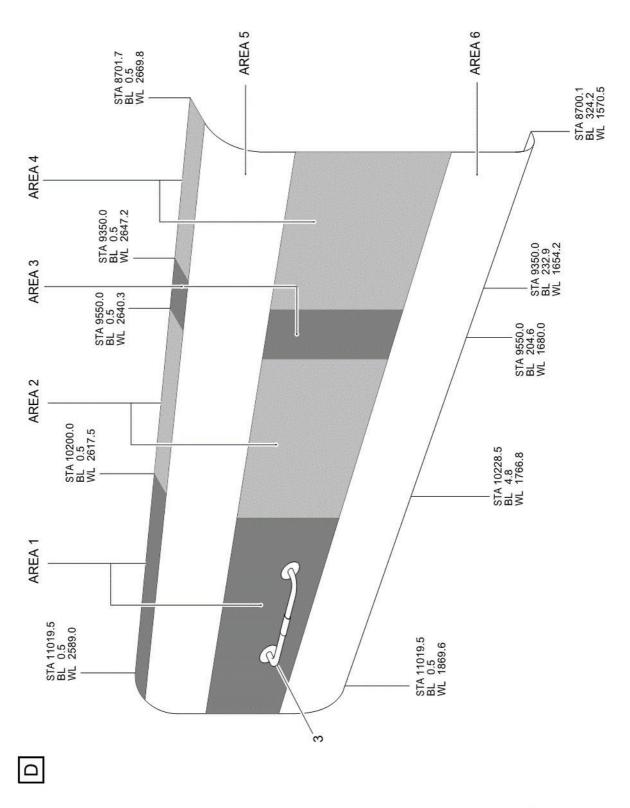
Tail section - Bonded skin panels - Detailed inspection (Sheet 3 of 6)
